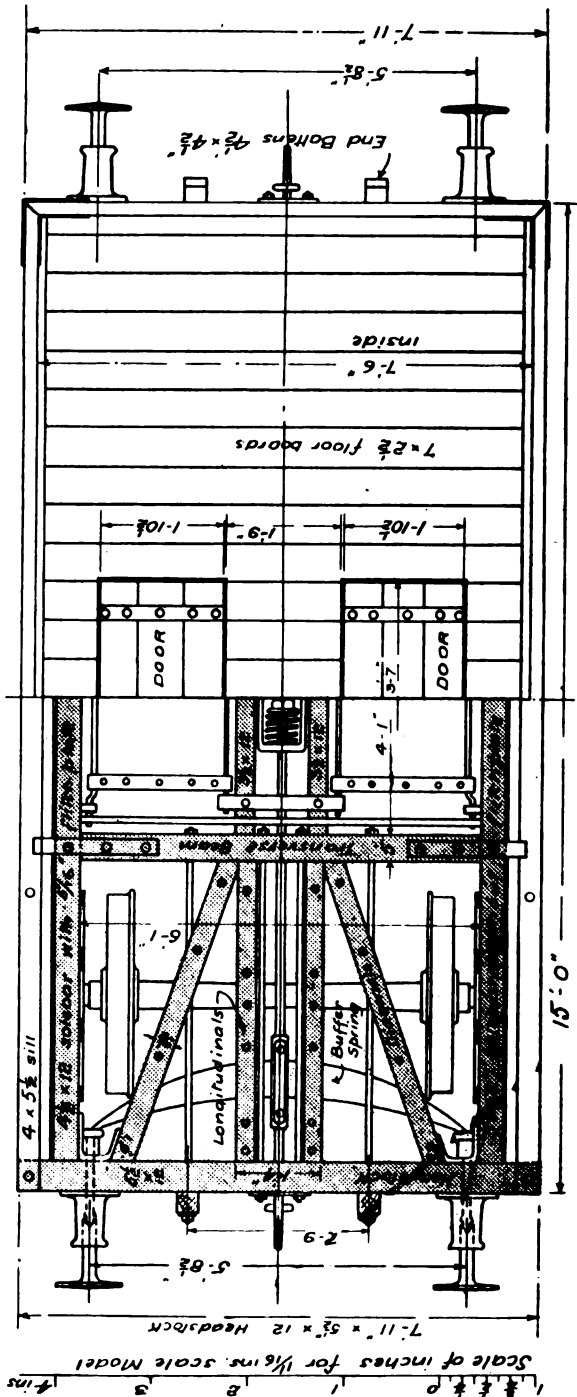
PLAN OF 8-, 10-, AND 12-TON PRIVATE OWNERS' WAGONS, WITH WOODEN BODY AND UNDER-FRAME. (See page 58.)
